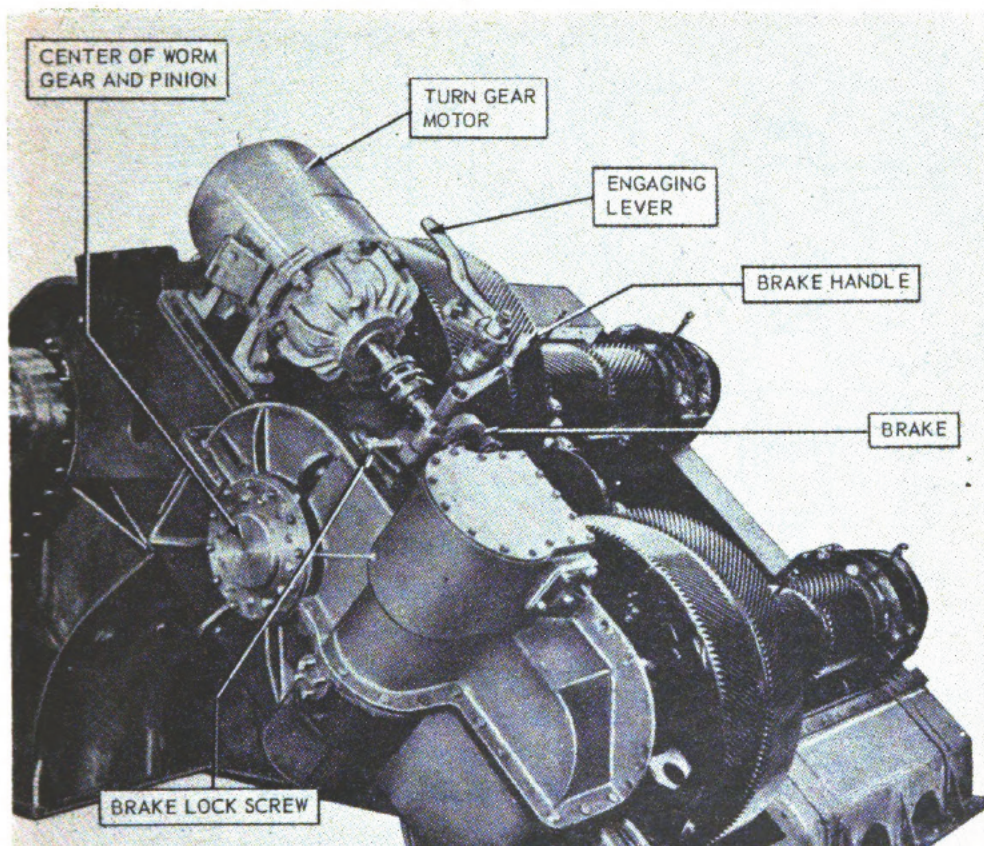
Main reduction gear after end, high-pressure side, showing turning gears and propeller locking mechanism.
